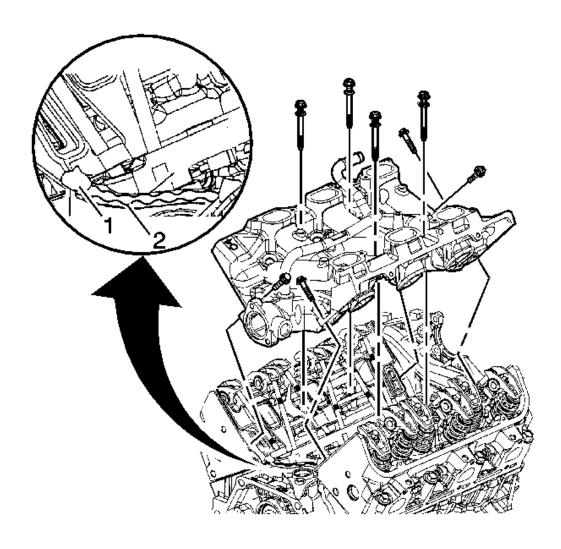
Installing Lower Intake Manifold Courtesy of GENERAL MOTORS CORP.
